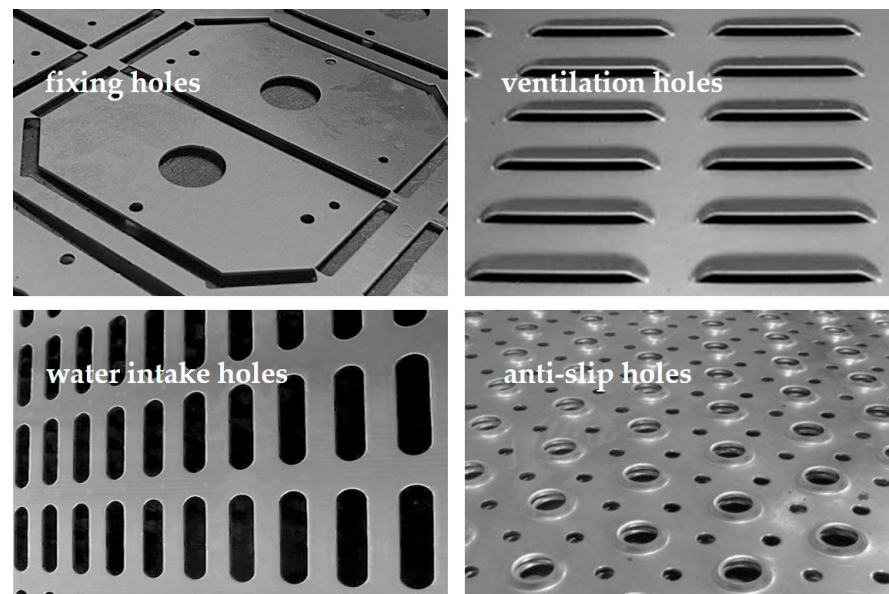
Some typical hole patterns in sheet metal products produced on CNC punching machines.
